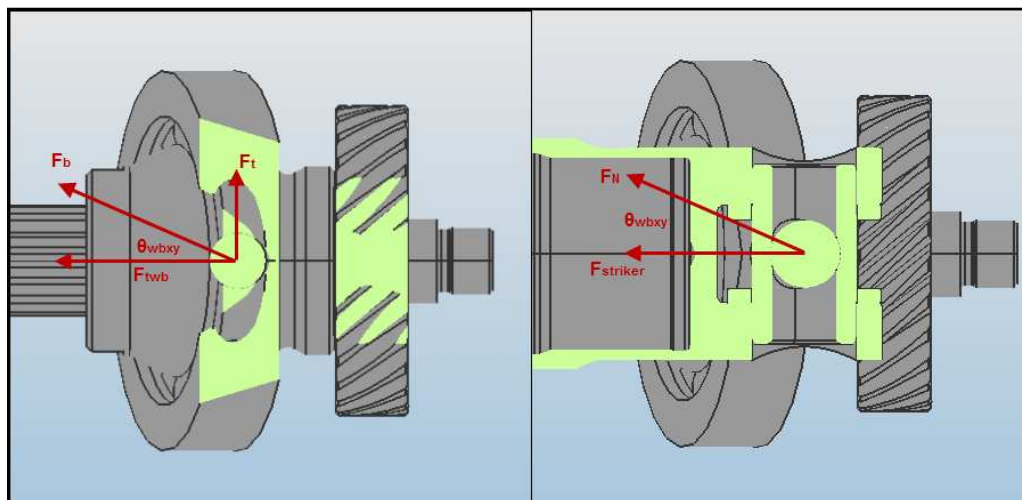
Wobble bearing forces (left) and striker forces (right), X-Y plane
